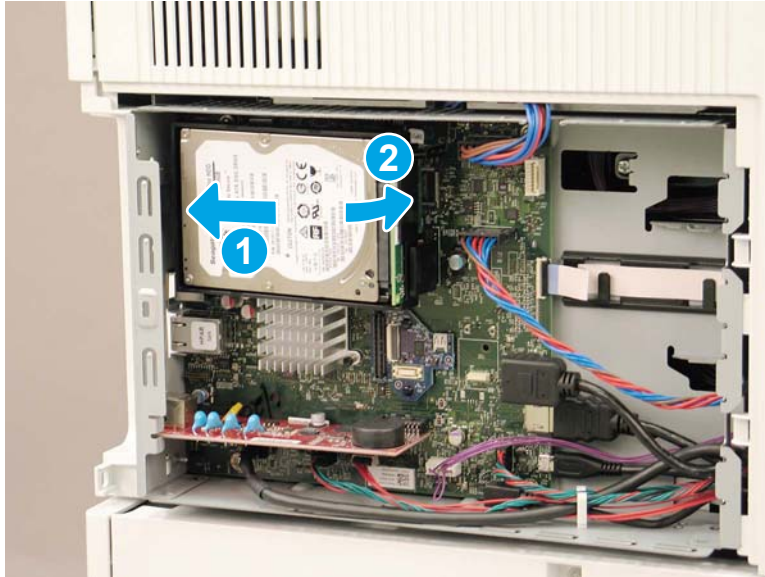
Locate the slot where the HDD mounting tab is installed
